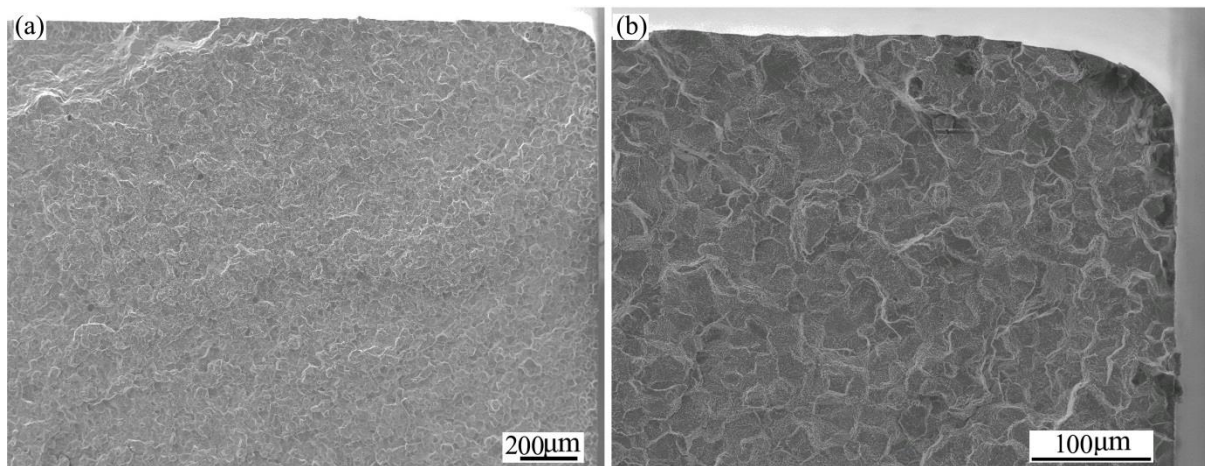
Fractography of the CG LSHR alloy tested at 725 °C in air: (a) overall view of the fracture surface and (b) intergranular crack initiation and propagation.
